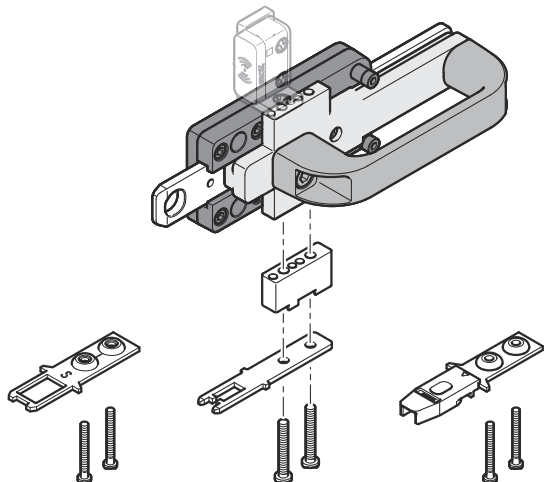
MB1-BL - Mounting the actuator for the safety locking device
